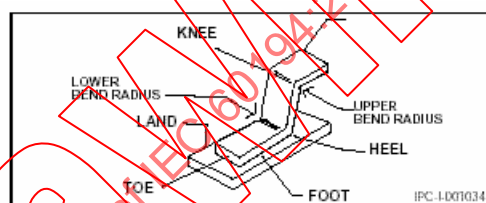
Leaded surface-mount component gull-wing shaped lead
